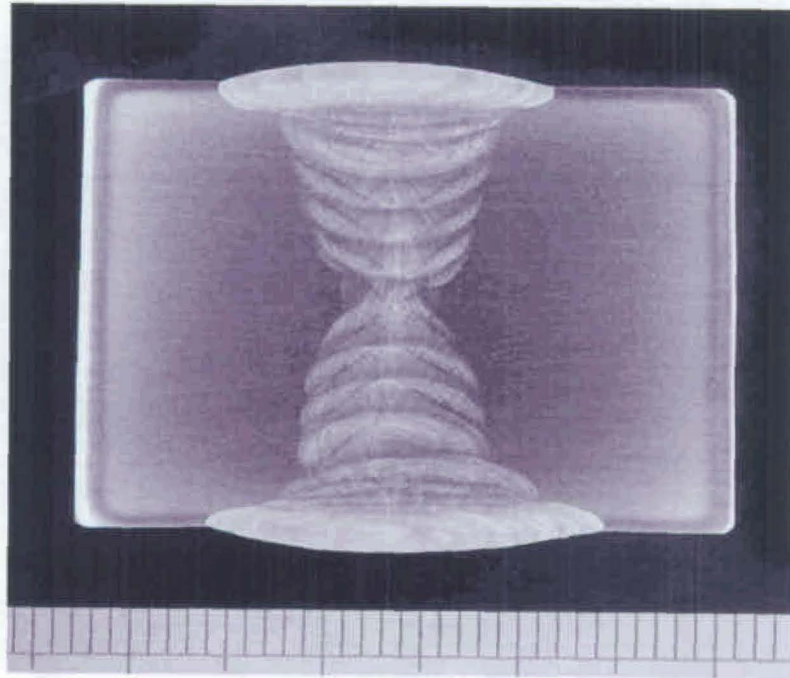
Cross-section of welded plate from which welded MCA specimens were fabricated. Double-U weld was completed in 8-10 passes. The plate is 3.175 cm (1.25 inches) thick.
